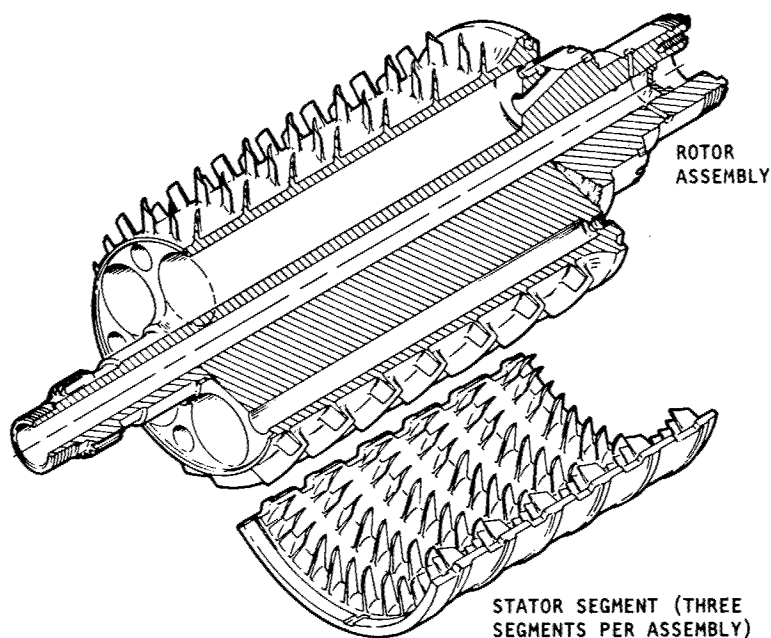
Rotor-stator assembly for Mark 15-F pump.
